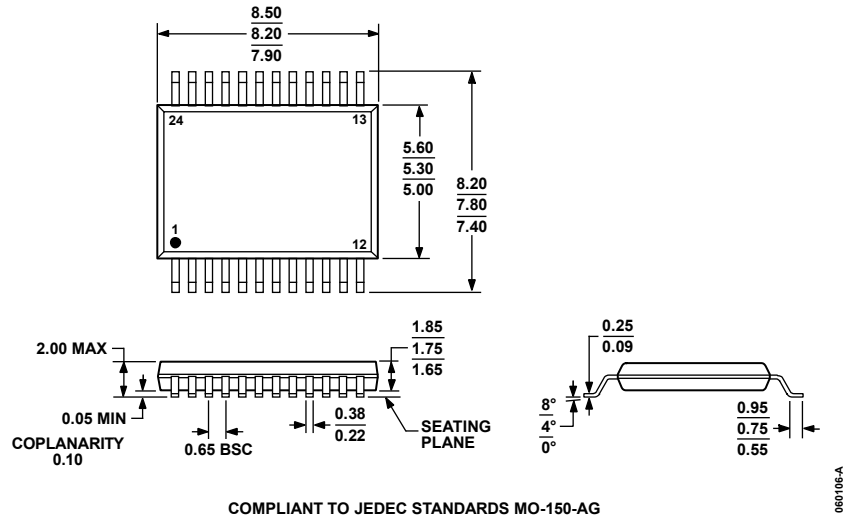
24-Lead Shrink Small Outline Package [SSOP]
